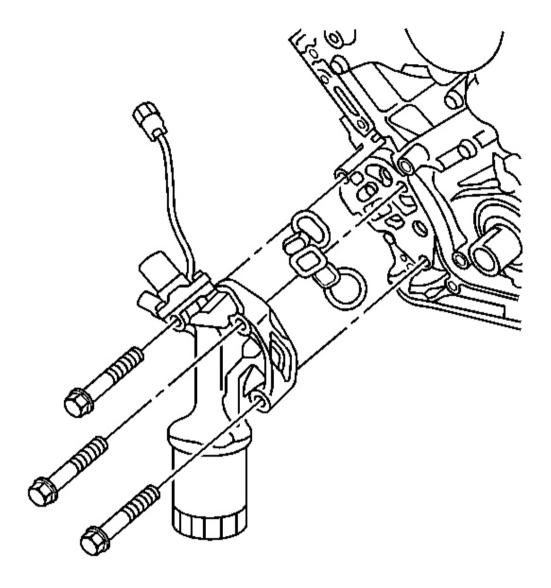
View Of Rocker Arm Oil Solenoid Valve Courtesy of GENERAL MOTORS CORP.
